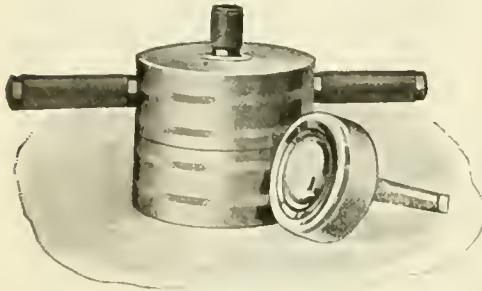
MOLD SET UP FOR CASTING GRINDING CUPS FOR UNIT ENDS.
